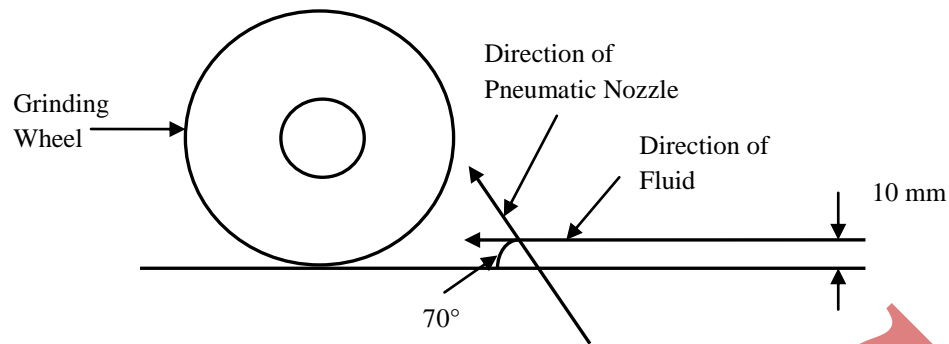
Experimental setup showing pneumatic and fluid nozzle position with grinding wheel
